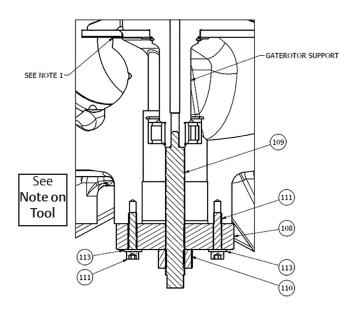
Tool To Install and Remove Bearing Housing Assembly
